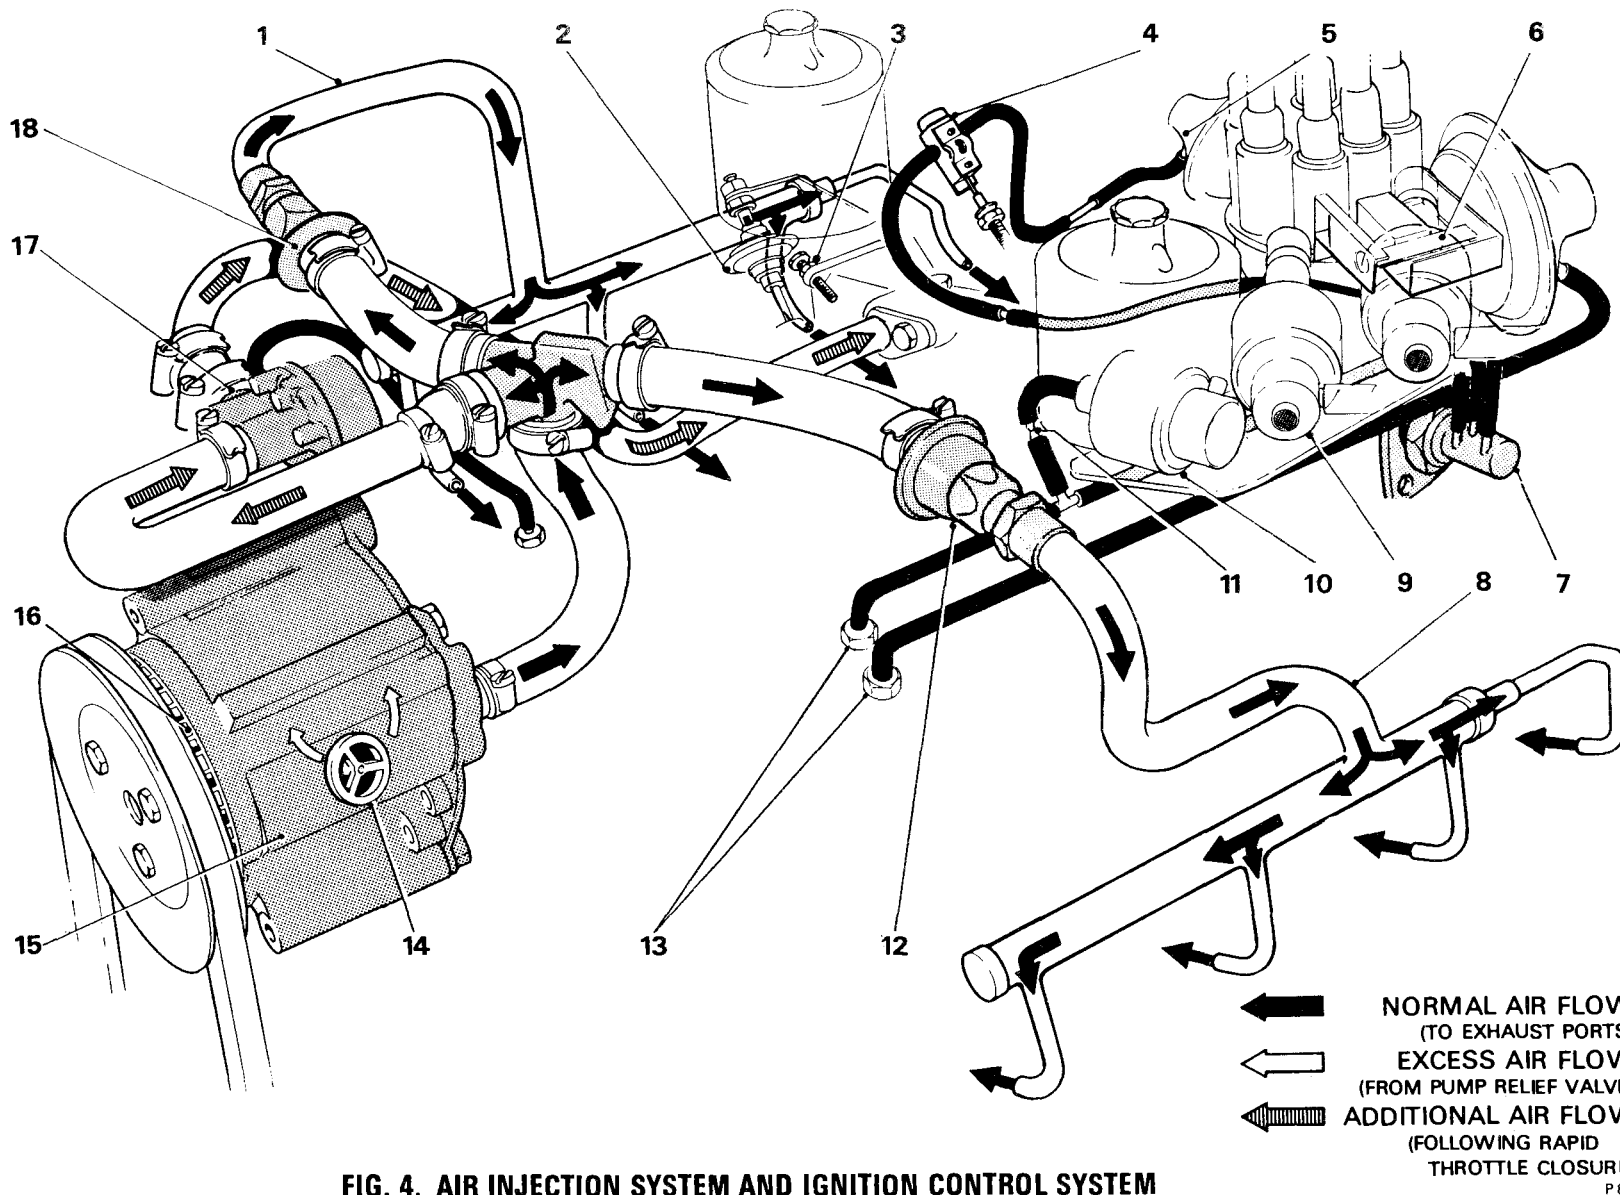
AIR INJECTION SYSTEM AND IGNITION CONTROL SYSTEM
